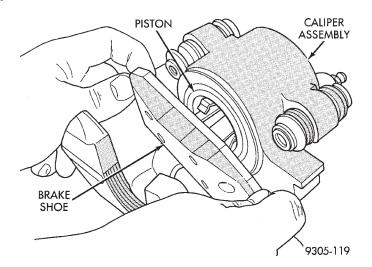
Installing Inboard Brake Shoe Assembly that caliper guide pin bushings and sleeves are clear of the steering knuckle bosses
